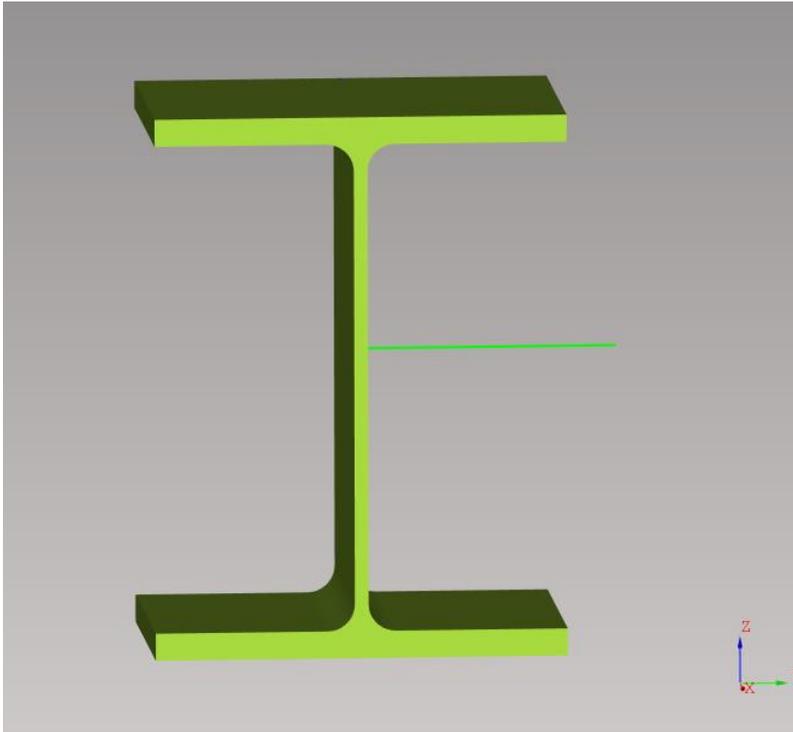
H-bar – (older position) top edge of cutting contour, where the cutting starts, needs to be in Y+ direction, the flanges are in Y-axis
